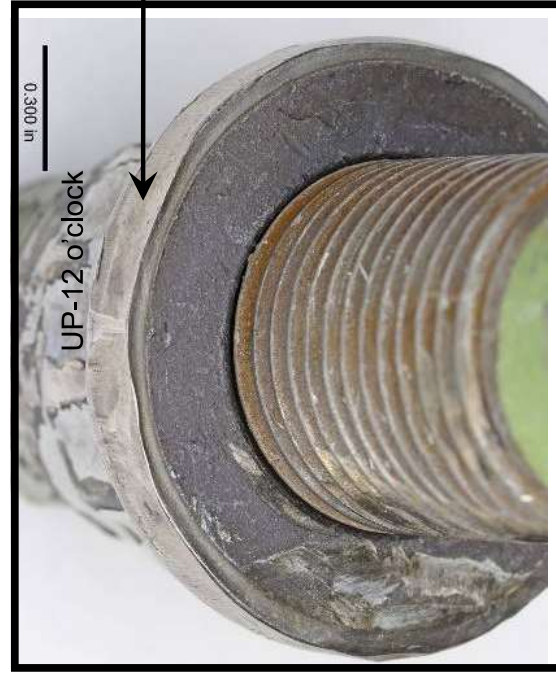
Detailed view of Tee Bolt Nut-12 o'clock position.
